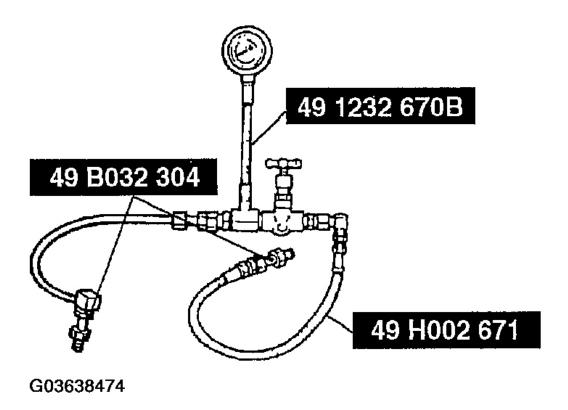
Assembling SSTs Courtesy of MAZDA MOTORS CORP.
